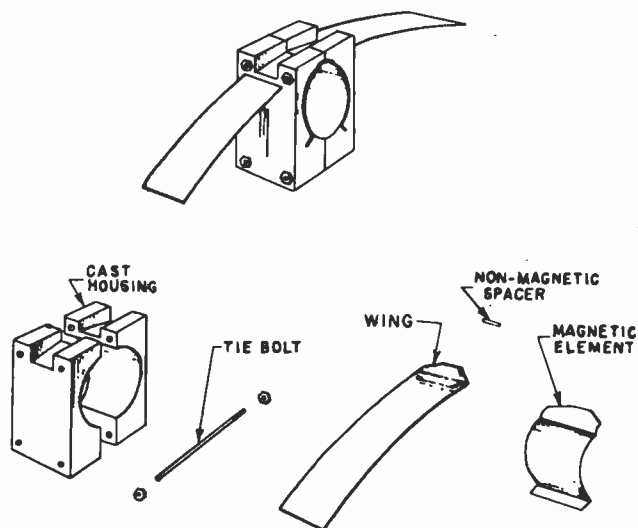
Assembly and exploded view of typical experimental winged core model.
